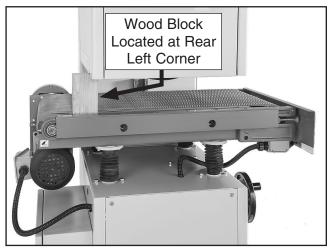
Wood block placed at rear left corner of conveyor table to check table parallelism.
